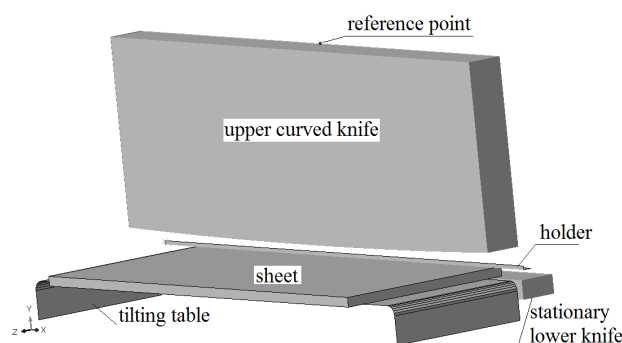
General view of cutting process simulation for sheets using curved knife on rolling cut type shears
